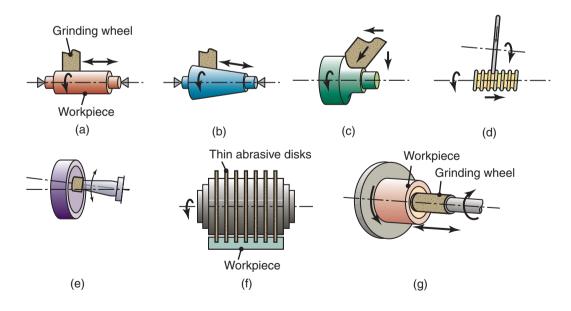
The types of workpieces and operations typical of grinding: (a) cylindrical surfaces, (b) conical surfaces, (c) fillets on a shaft, (d) helical profiles, (e) concave shape, (f) cutting off or slotting with thin wheels, and (g) internal grinding.
